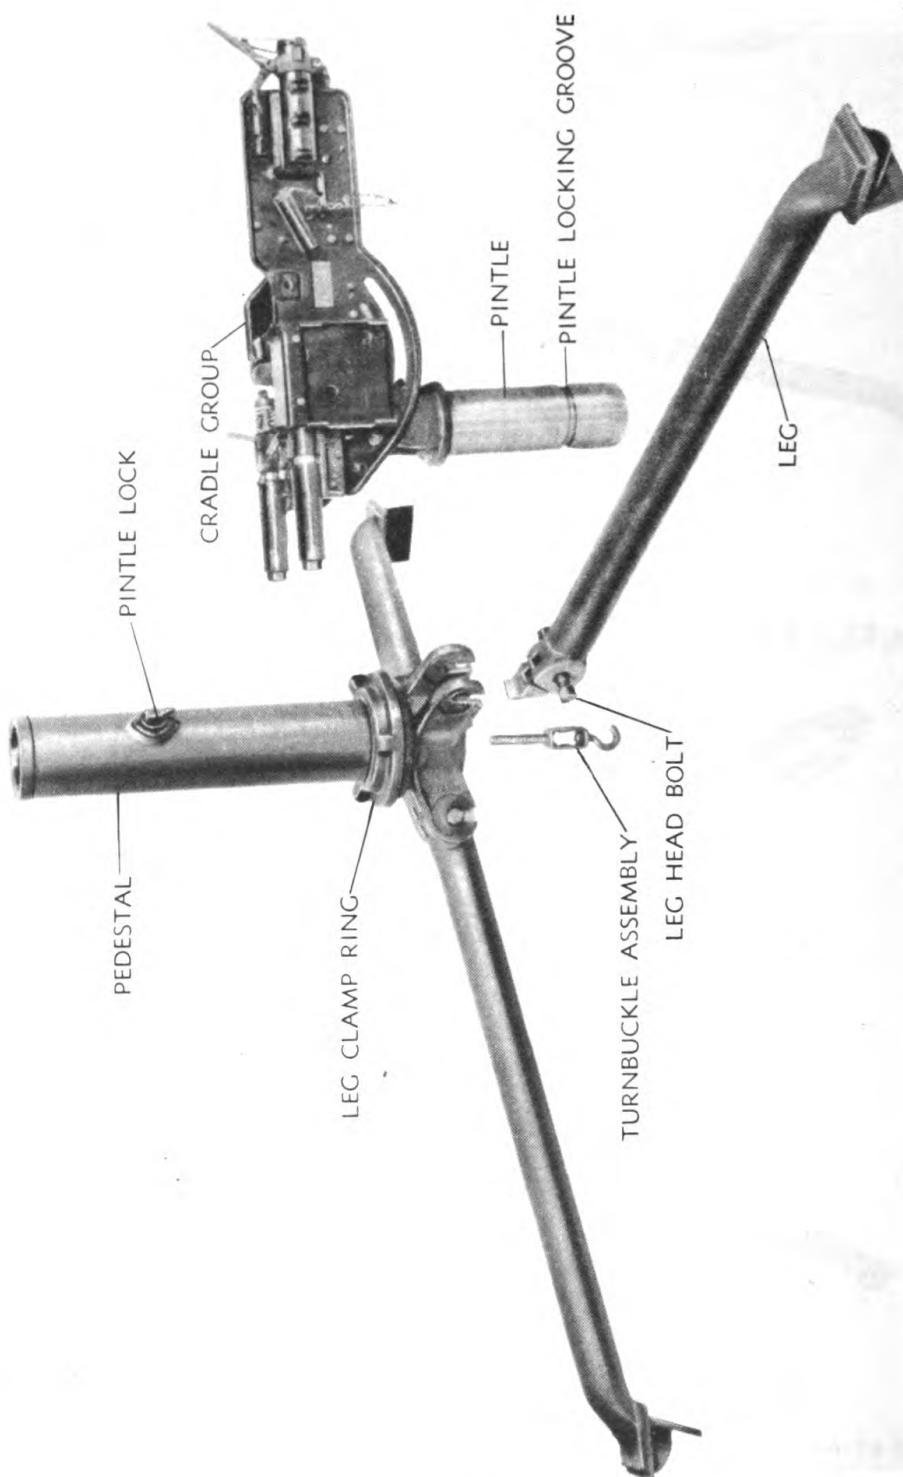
Groups Dismounted — A.A. Machine Gun Mount, Cal. .50, M2A1
